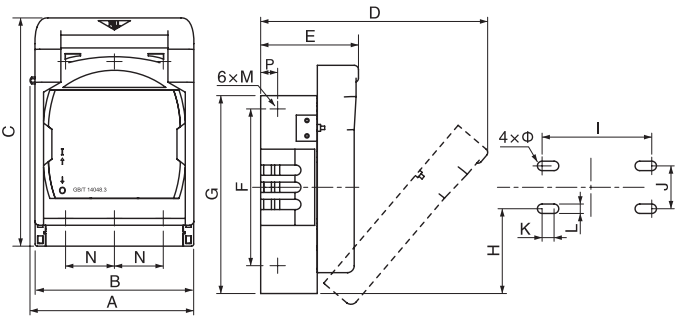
Installation and outline dimensions drawing for HR17N series fixed type
